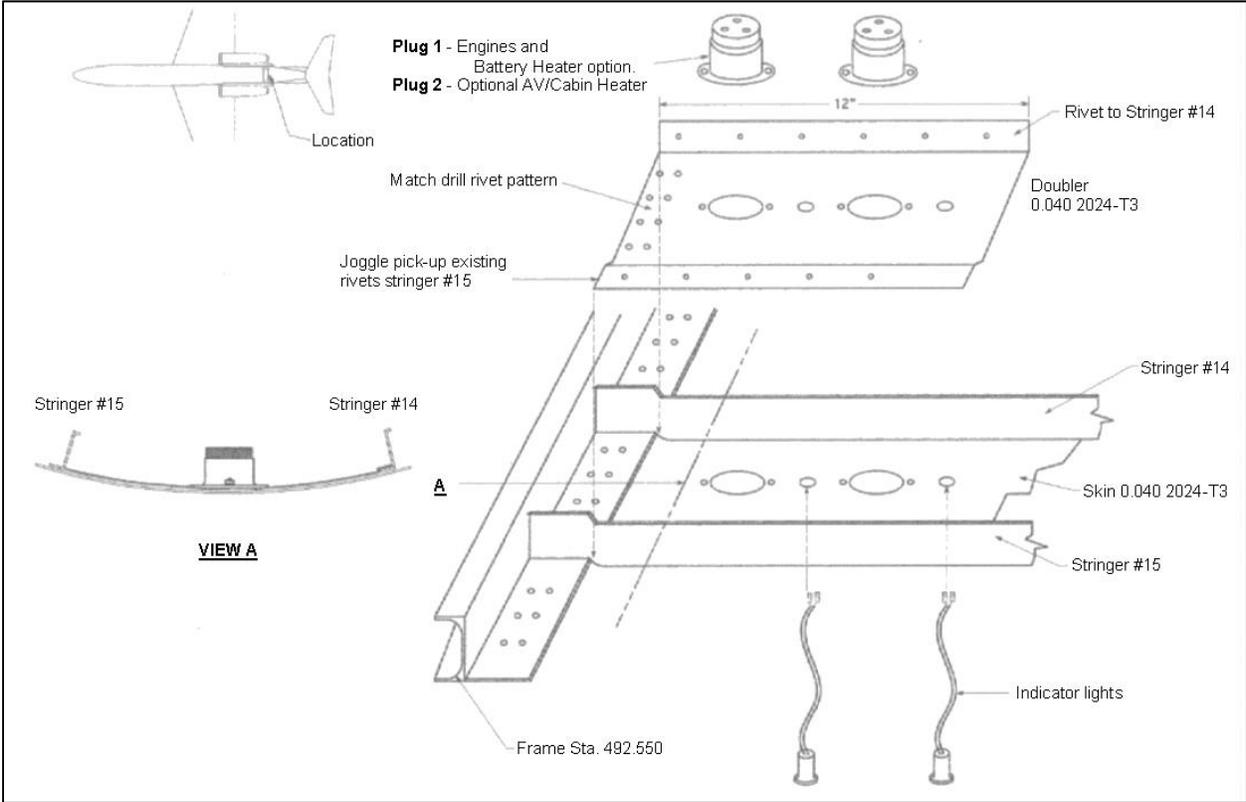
Example of plug mounting near hell hole in Learjet 31A, bracket field fabricated.
